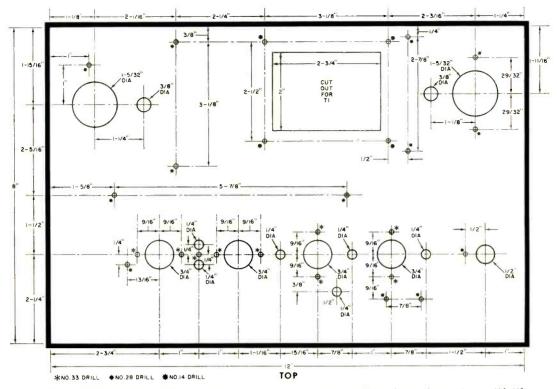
Diagram shows cutouts, mounting holes in top of chassis. At front, from left to right, are V4, V1, V2, V3. Large hole at top left is for mounting V5; opposite are cutouts for T1 and for capacitor C25.
